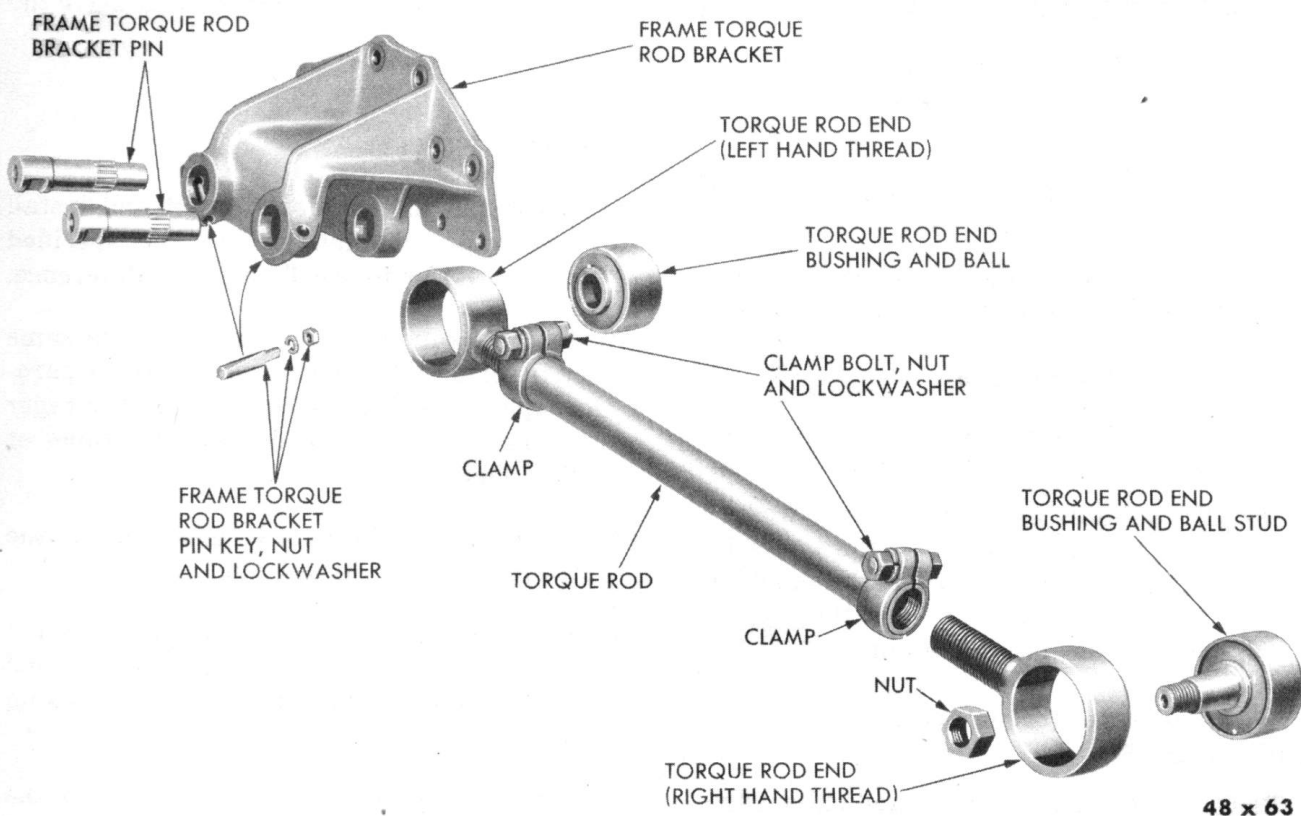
Axle, Upper Torque Rod (Disassembled)
